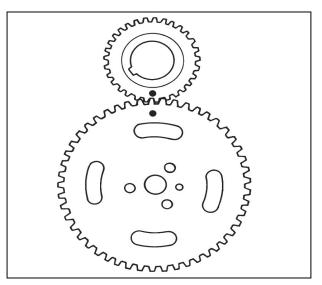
Balance Shaft Drive Gear-to- Driven Gear Timing Marks
